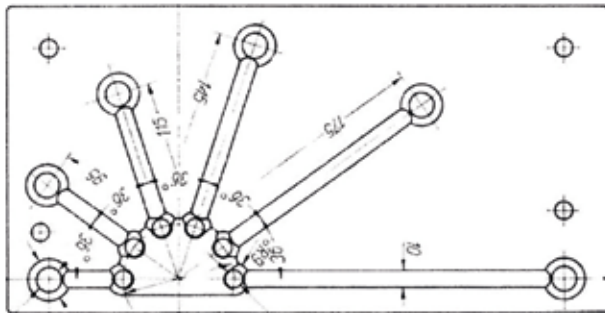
Test for metal moulds: 1 – gate runner, 2 – ceramic filter (own working out on the basis of [3])
